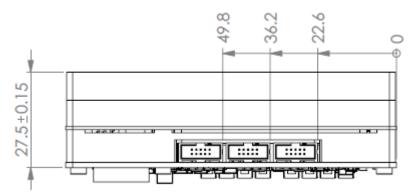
Mechanical Drawing of NANOlink-boost-dp - Front view
